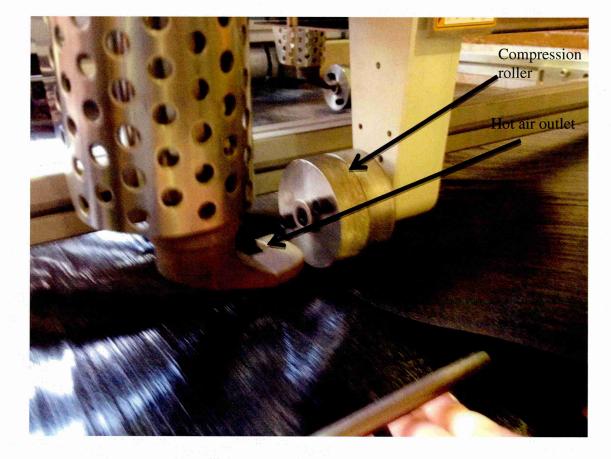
Stage 1 – Double Hot Air Welding Unit.
